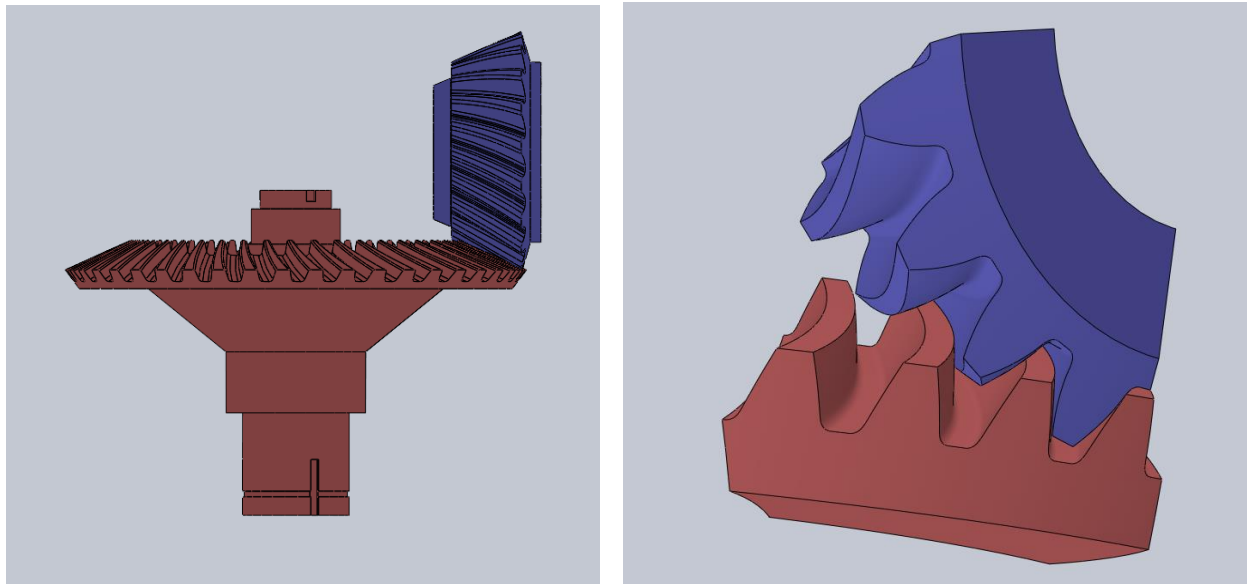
Assembly of the final gear reducer parts in SolidWorks
